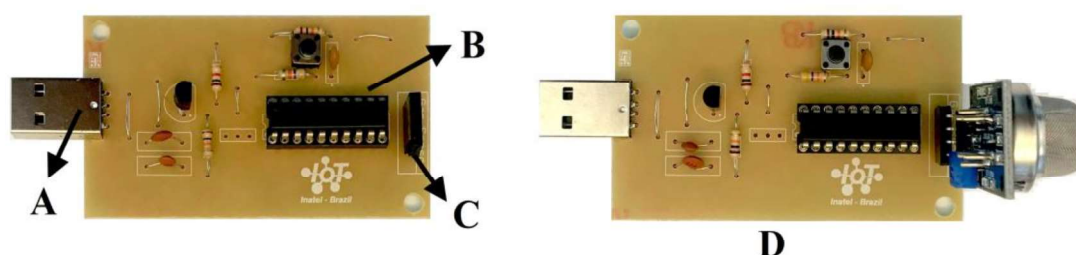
Sensing Boards, where A. is the USB connector; B. is the MSP430 low-power MCU; C. is the gas transducer connector; and D. is one of the sensing boards assembled with the methane transducer.
